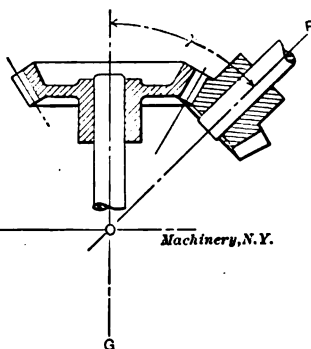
Acute Bevel Gearing Used as Substitute for Internal Gearing in Fig. 16
